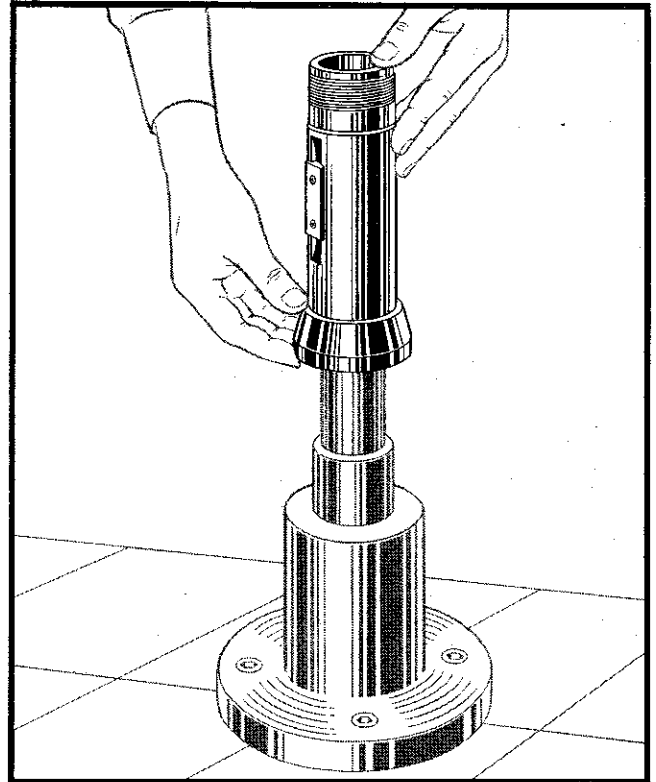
Installing Assembly & Balance Sleeve on Assembly Post
